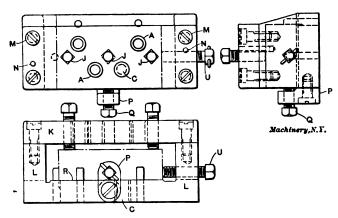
Further Improvements in Jig. suiting it to Manufacturing Purposes
